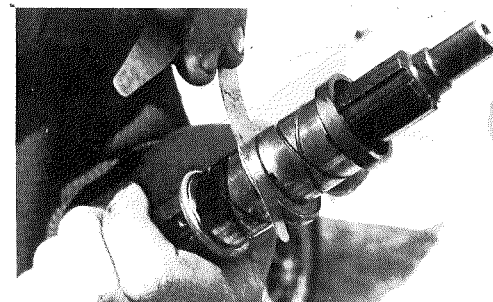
Similar and for completeness, I've shown here how you could check the second and third gear bush end float. Thread the scrolled thrust washer over the mainshaft, followed by the bush and relevant gear and then the thick thrust washer. The end float measured as shown should be 2-6 thou. Again, the original components should match up to this. Mine were fine.
